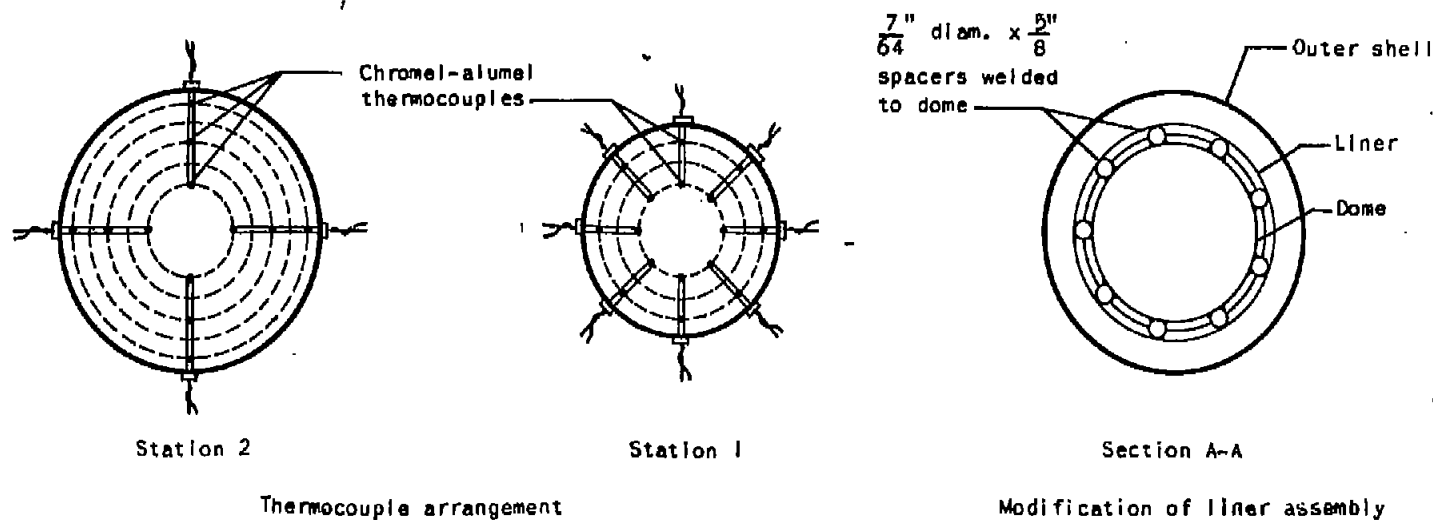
Diagrammatic sketch of single tubular-type combustor showing modification of liner assembly and thermocouple locations.
